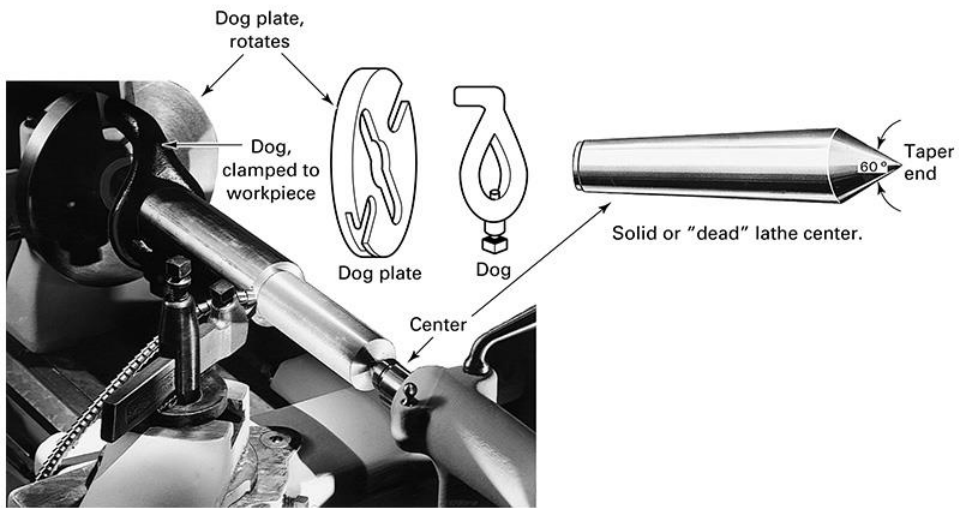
Work being turned between centers in a lathe, showing the use of a dog and dog plate. (Courtesy of South Bend Lathe.)
